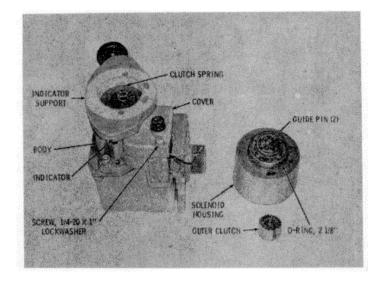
Shift Tower Assembly with Solenoid Housing Removed
